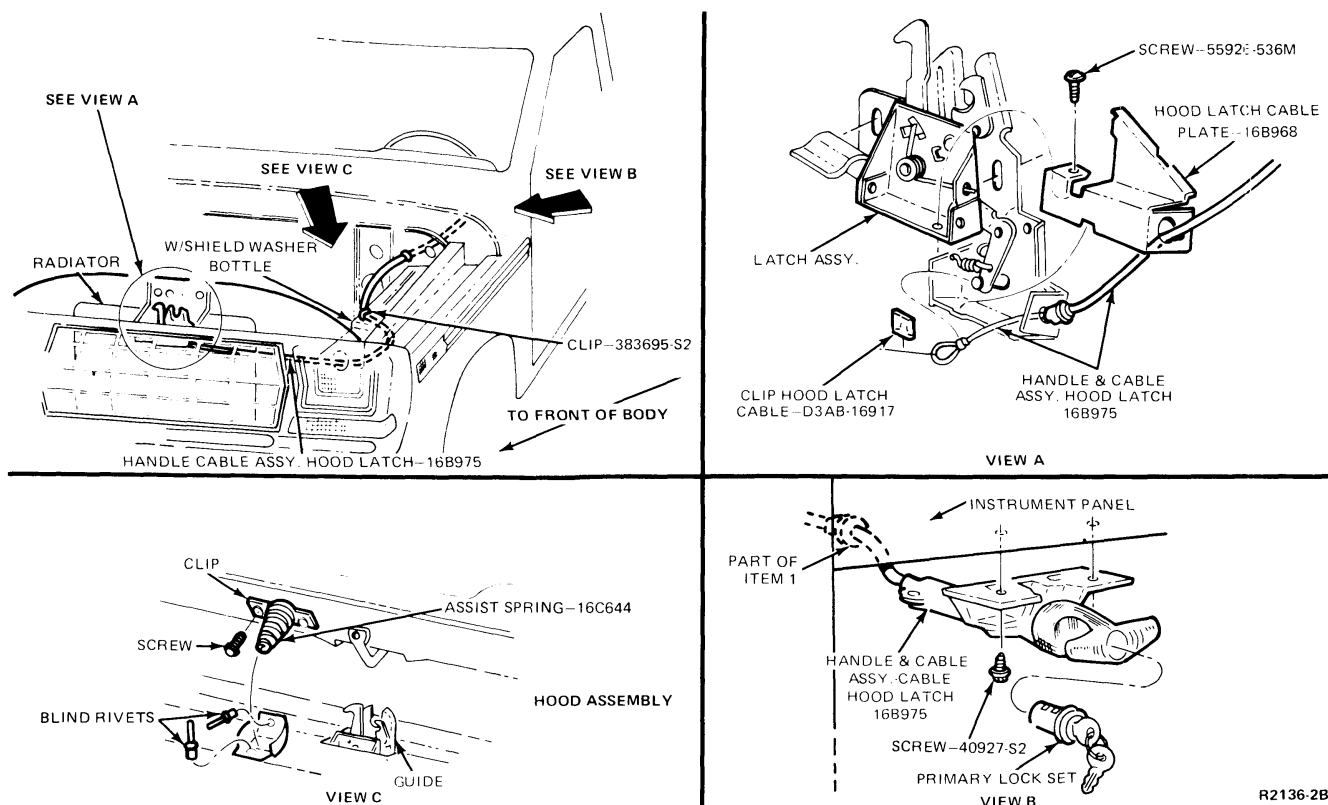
Hood Latch Remote Control Cable and Lock—E-100 Through E-350
